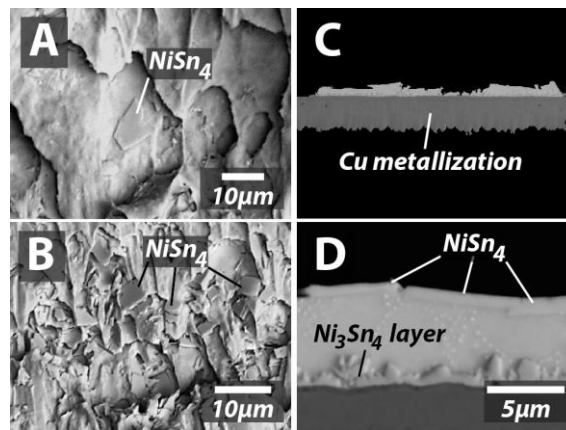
Fracture surfaces of $500\mu\text{m}$ Sn-3.5Ag-0.1Ni solder balls soldered to ENIG. (A), (B): view from above and (C), (D): side view featuring coarsened NiSn_4 particles. Ageing conditions: 1 month at 150°C .
